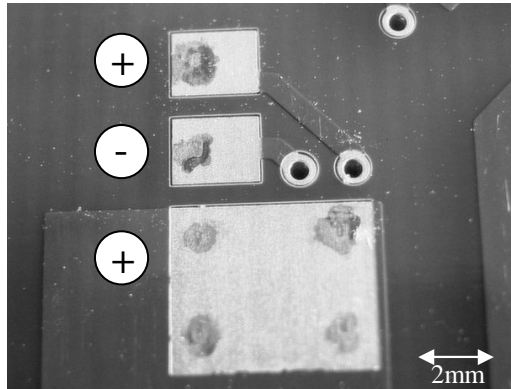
PCB pads of a Ni/Au-flash PCB after corrosive atmosphere test (10 ppm H₂S, 25°C, 75% RH, 10 days, 80V bias). Bias indicated next to the contact pads
